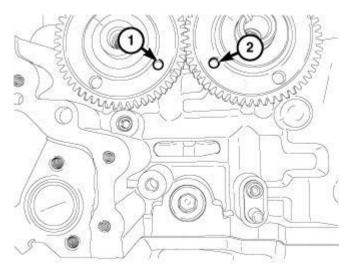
Left Side Intake & Exhaust Camshaft, Camshaft Bearing Caps & Bolts Courtesy of CHRYSLER GROUP, LLC
